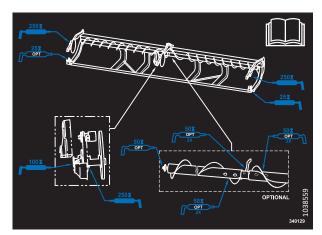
Decal for Double-Knife Header with Two-Piece Upper Cross Auger
